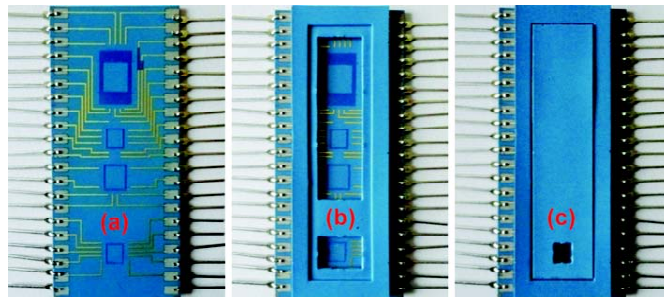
(a) Fabricated LTCC Base (b) Integrated LTCC Package (c) LTCC package with lid
